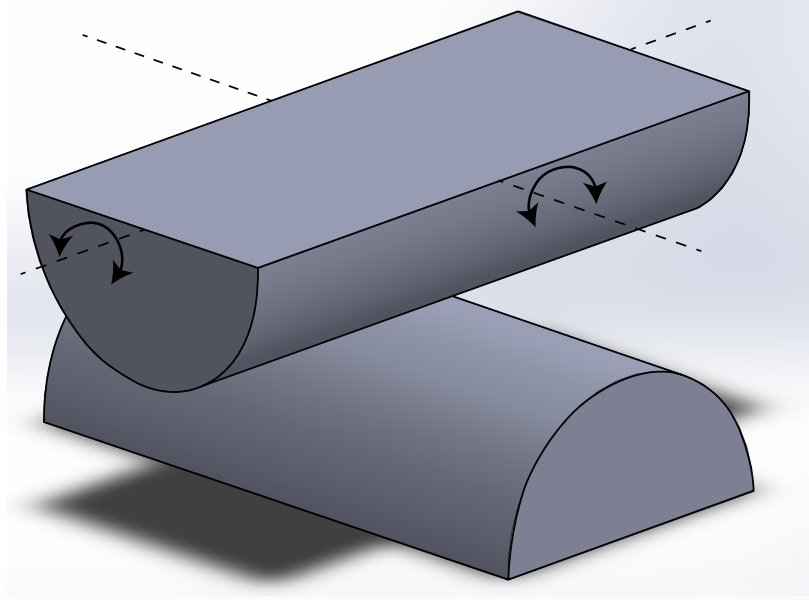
The upper cylinder is able to roll along the axial direction of the lower cylinder. It can also roll about the axis of the lower cylinder, as shown by the arrows.
